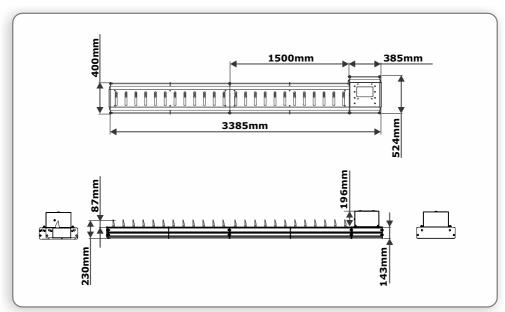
INDEPENDENT DRIVE FLUSH MOUNT CLAWS OVERALL DIMENSIONS
